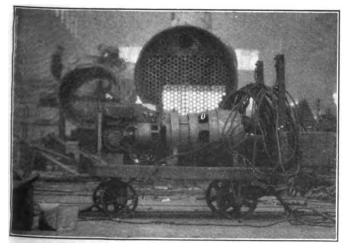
Portable Electric Arc Welding Equipment
